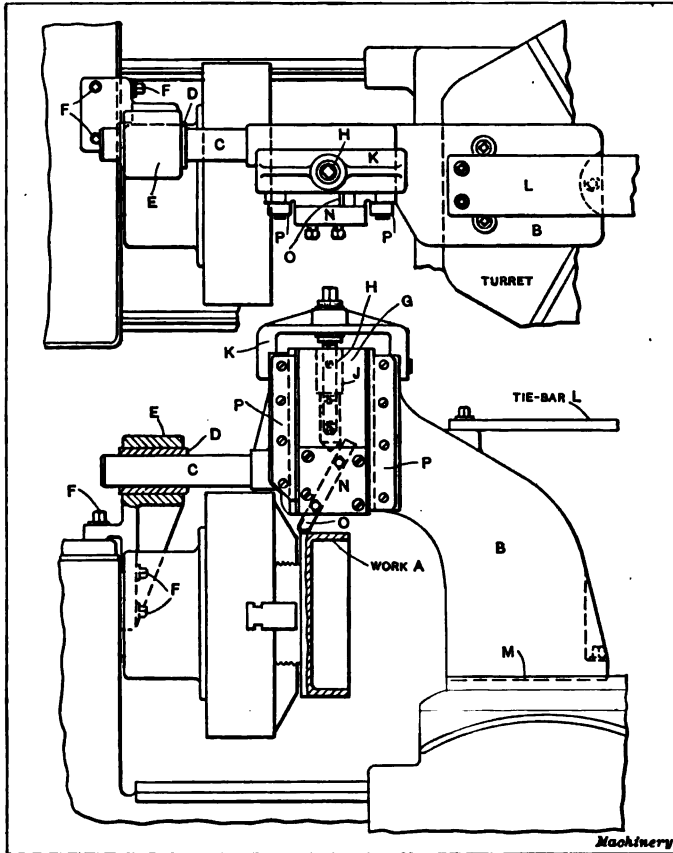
Adjustable Piloted Turning Tool for Large Work
